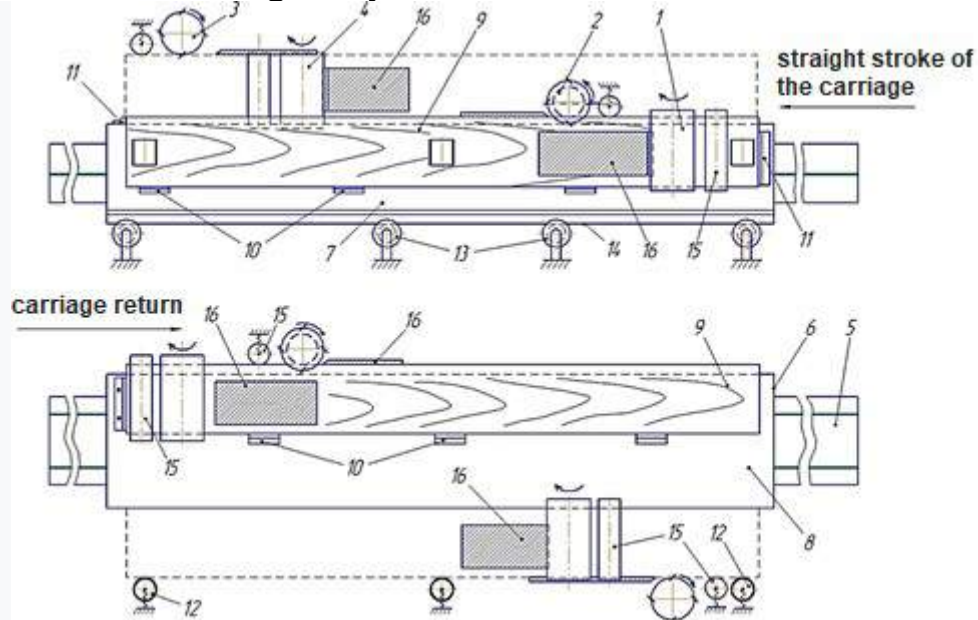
Schematic diagram of a four-side peripheral-milling machine S20PK (patent for invention No. 110435) [14]
